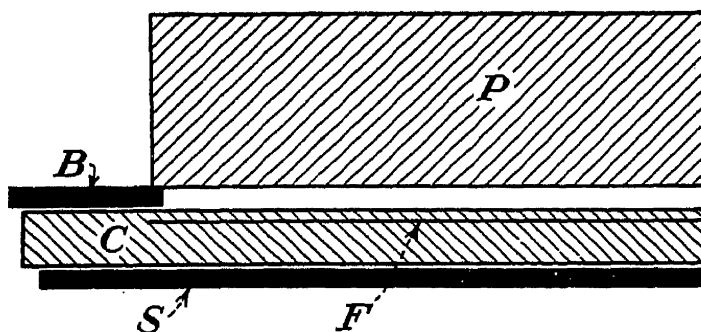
Lead strip *B* used as blocking material along edges of thick metal specimen *P*.
